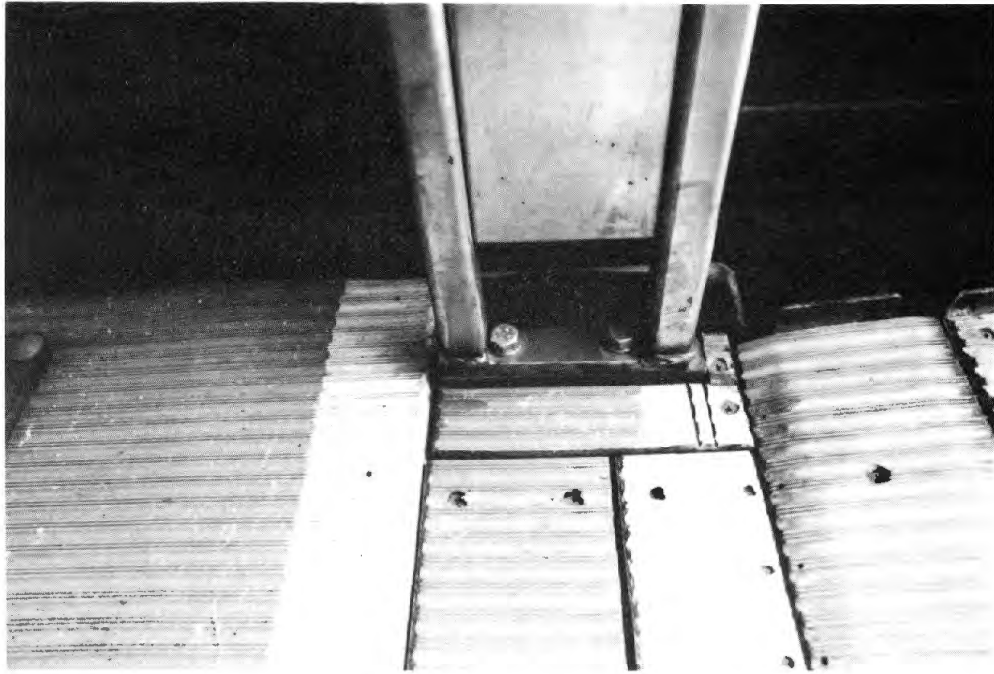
HANDRAILS REWELDED AT THEIR BASE ON EEC 120B LIFT
